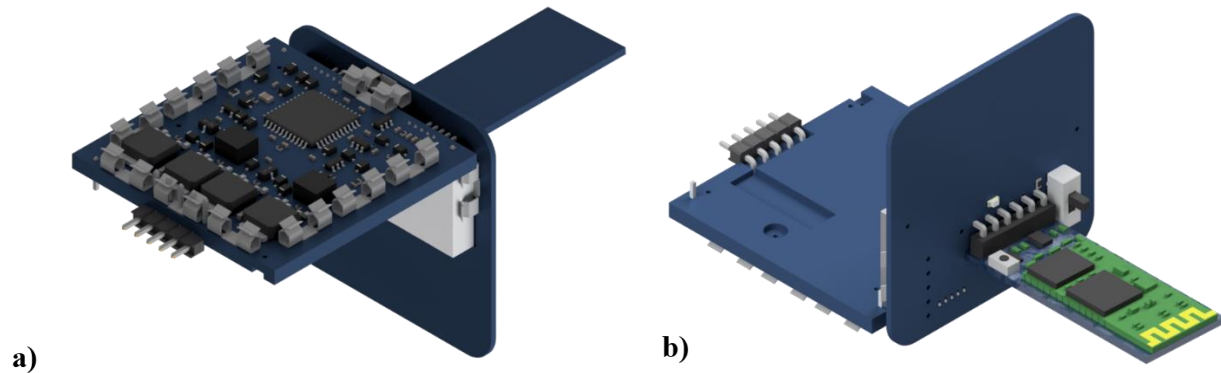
The Microcontroller Subsystem PCB a) Bottom View, and b) Top View
